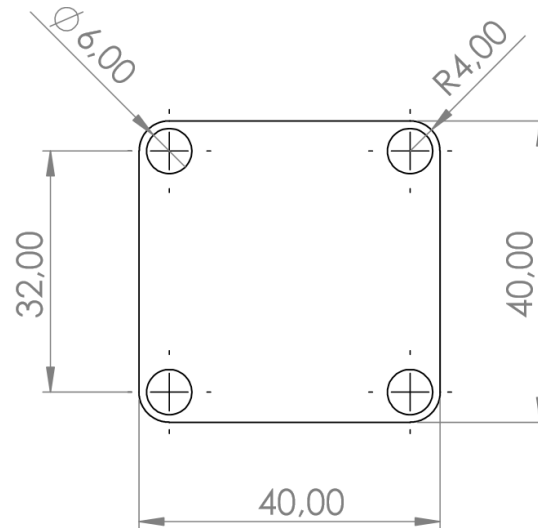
Dimensioned CAD of a single sheet, model Plate-A. Thickness: 0.1 mm
